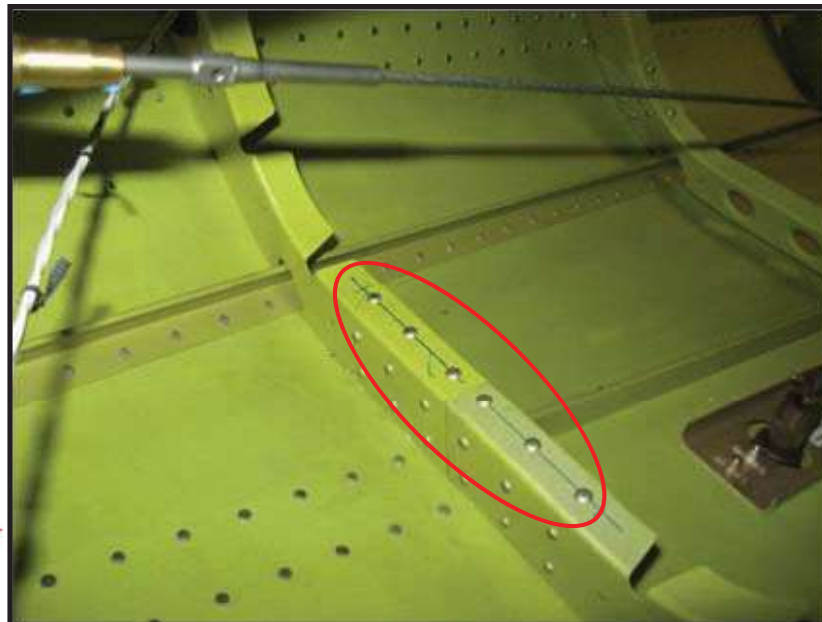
Illustrates fasteners through side frames and bottom frame splice.
